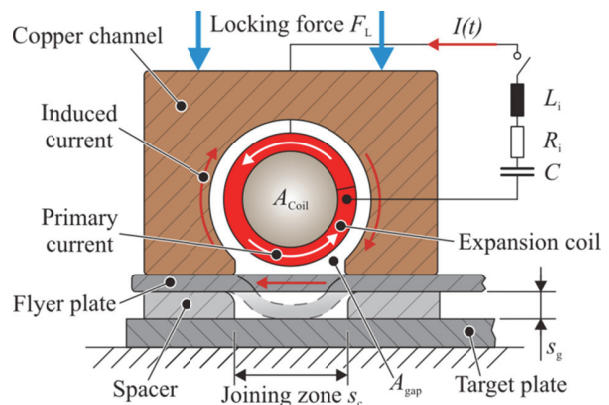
UPEA actuator setup for pulse welding of flat connections.
